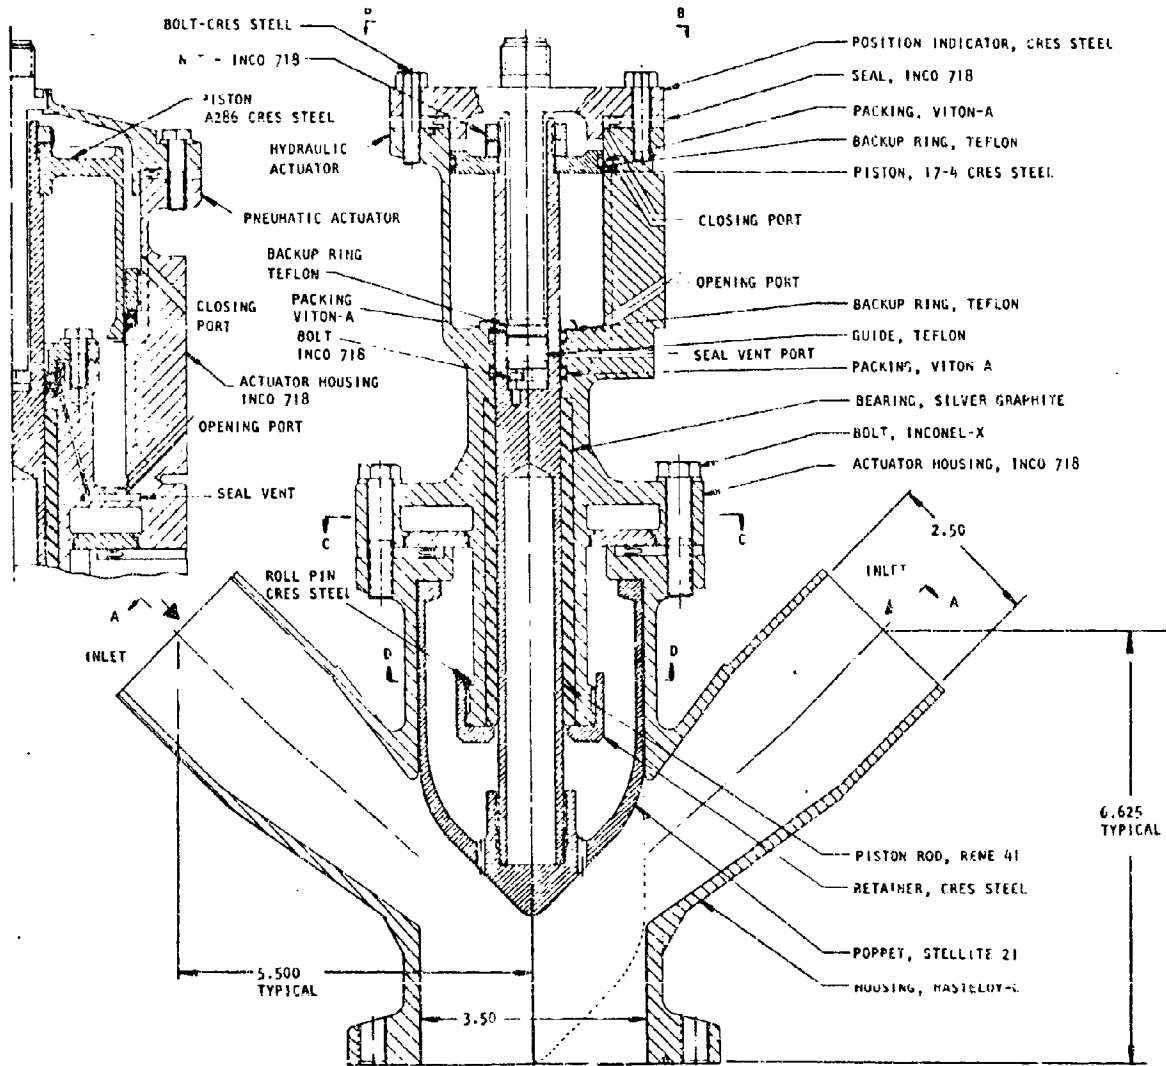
A. Hot-Gas Tapoff Throttle Valve Assembly
